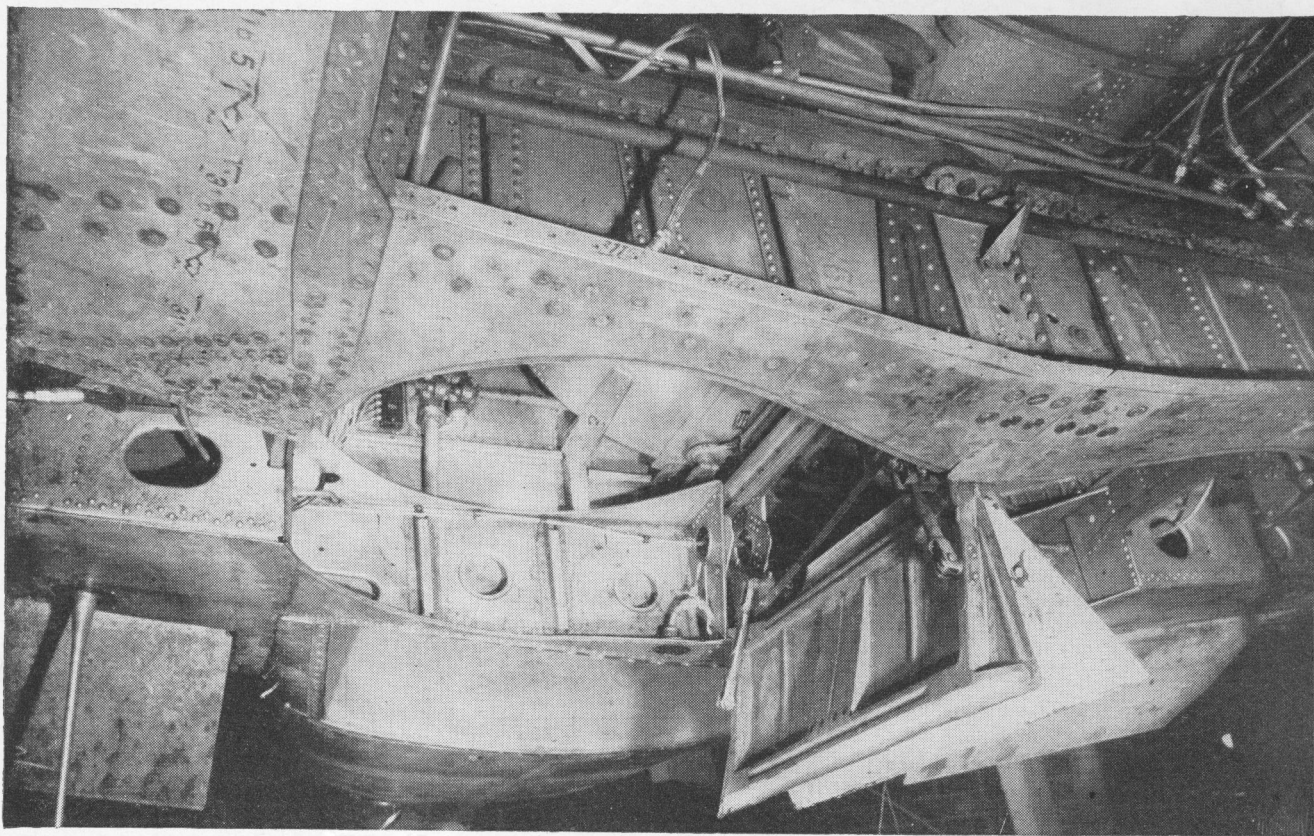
Looking up and aft into the main gear wheel well. Center-line fairing doors, which serve as landing gear up-lock, and the construction of the auxiliary spar will be noted. Just above this spar can be seen the bottom part of a cylindrically shaped cockpit liner, a unit designed for pressurization but unused in this way. The opening in front of the main spar takes a 53-gal reserve fuel tank.
